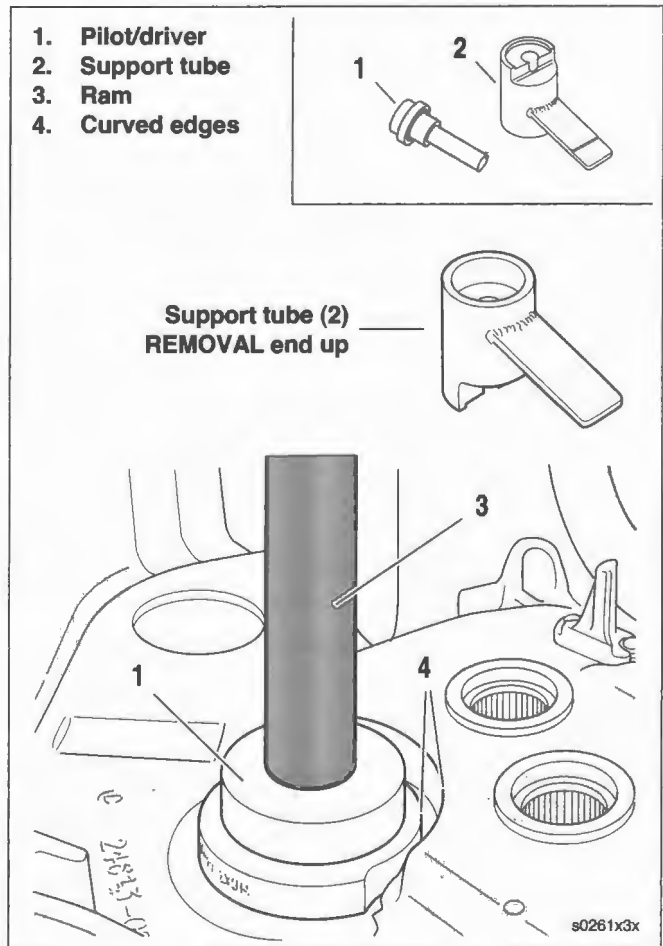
Right Crankshaft (Roller) Bearing Removal
